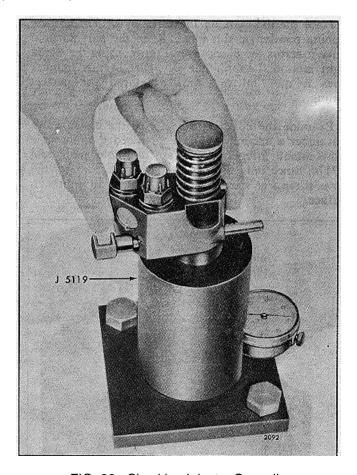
Checking Injector Spray lip Concentricity using Tool J 5119
